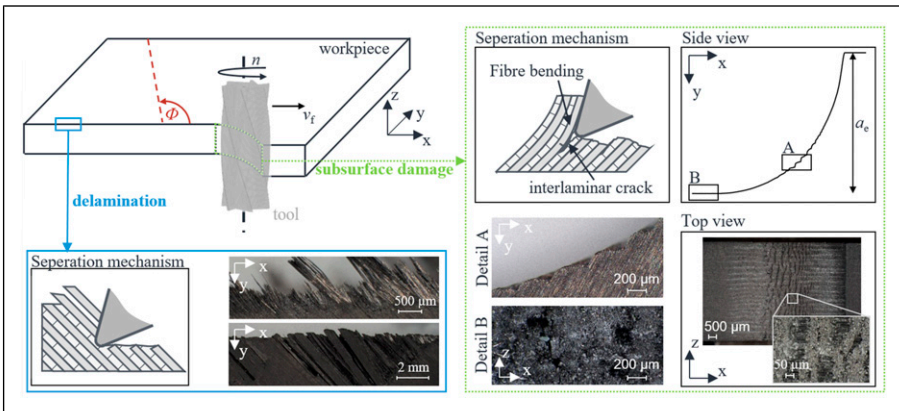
Damage mechanism (delamination and subsurface damage) due to milling.
